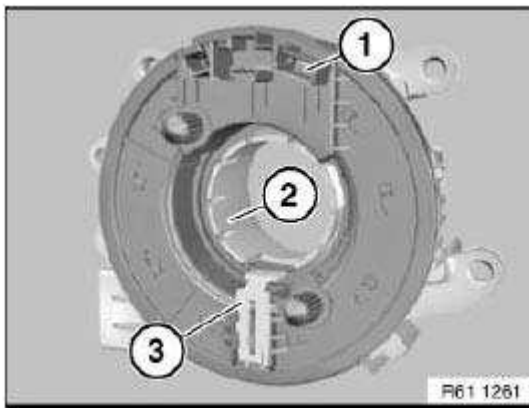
Identifying Cover Of Fixture For Steering Column Stalk
